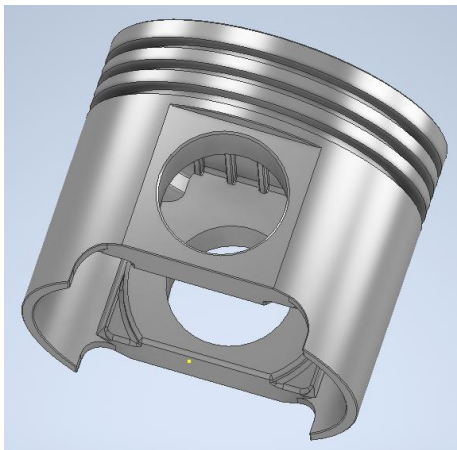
Engine piston, which can be made of magnesium alloy WE43A or Al-Si casting alloy AK12 AK12
